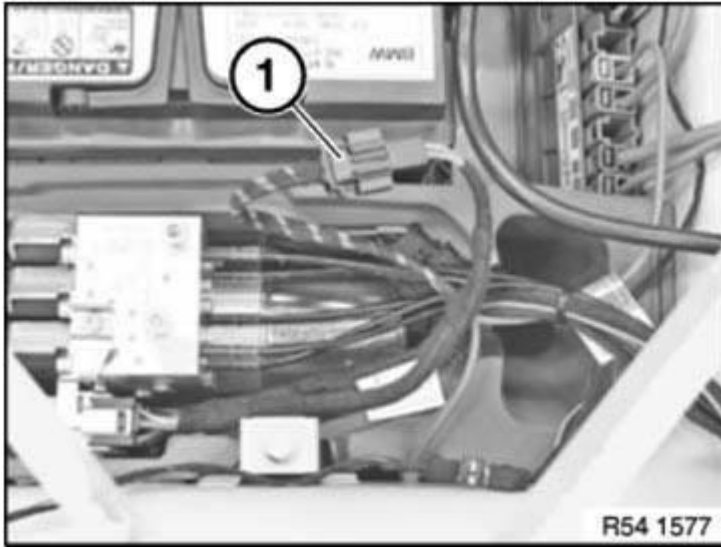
Identifying Plug Connections For Hydraulic Control Unit
